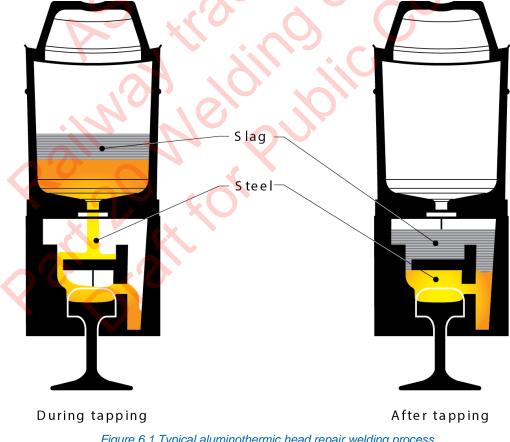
Typical aluminothermic head repair welding process
